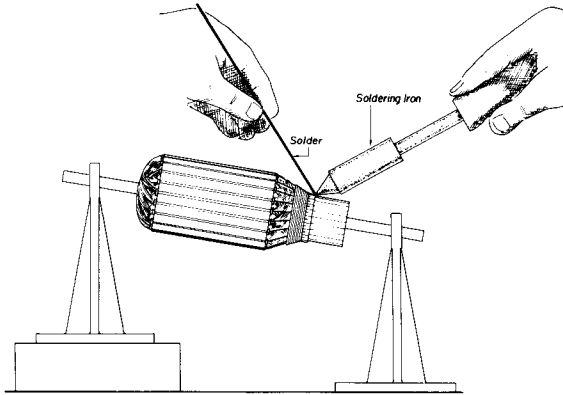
Soldering leads to the commutator. The soldering iron is held slightly above the horizontal.
